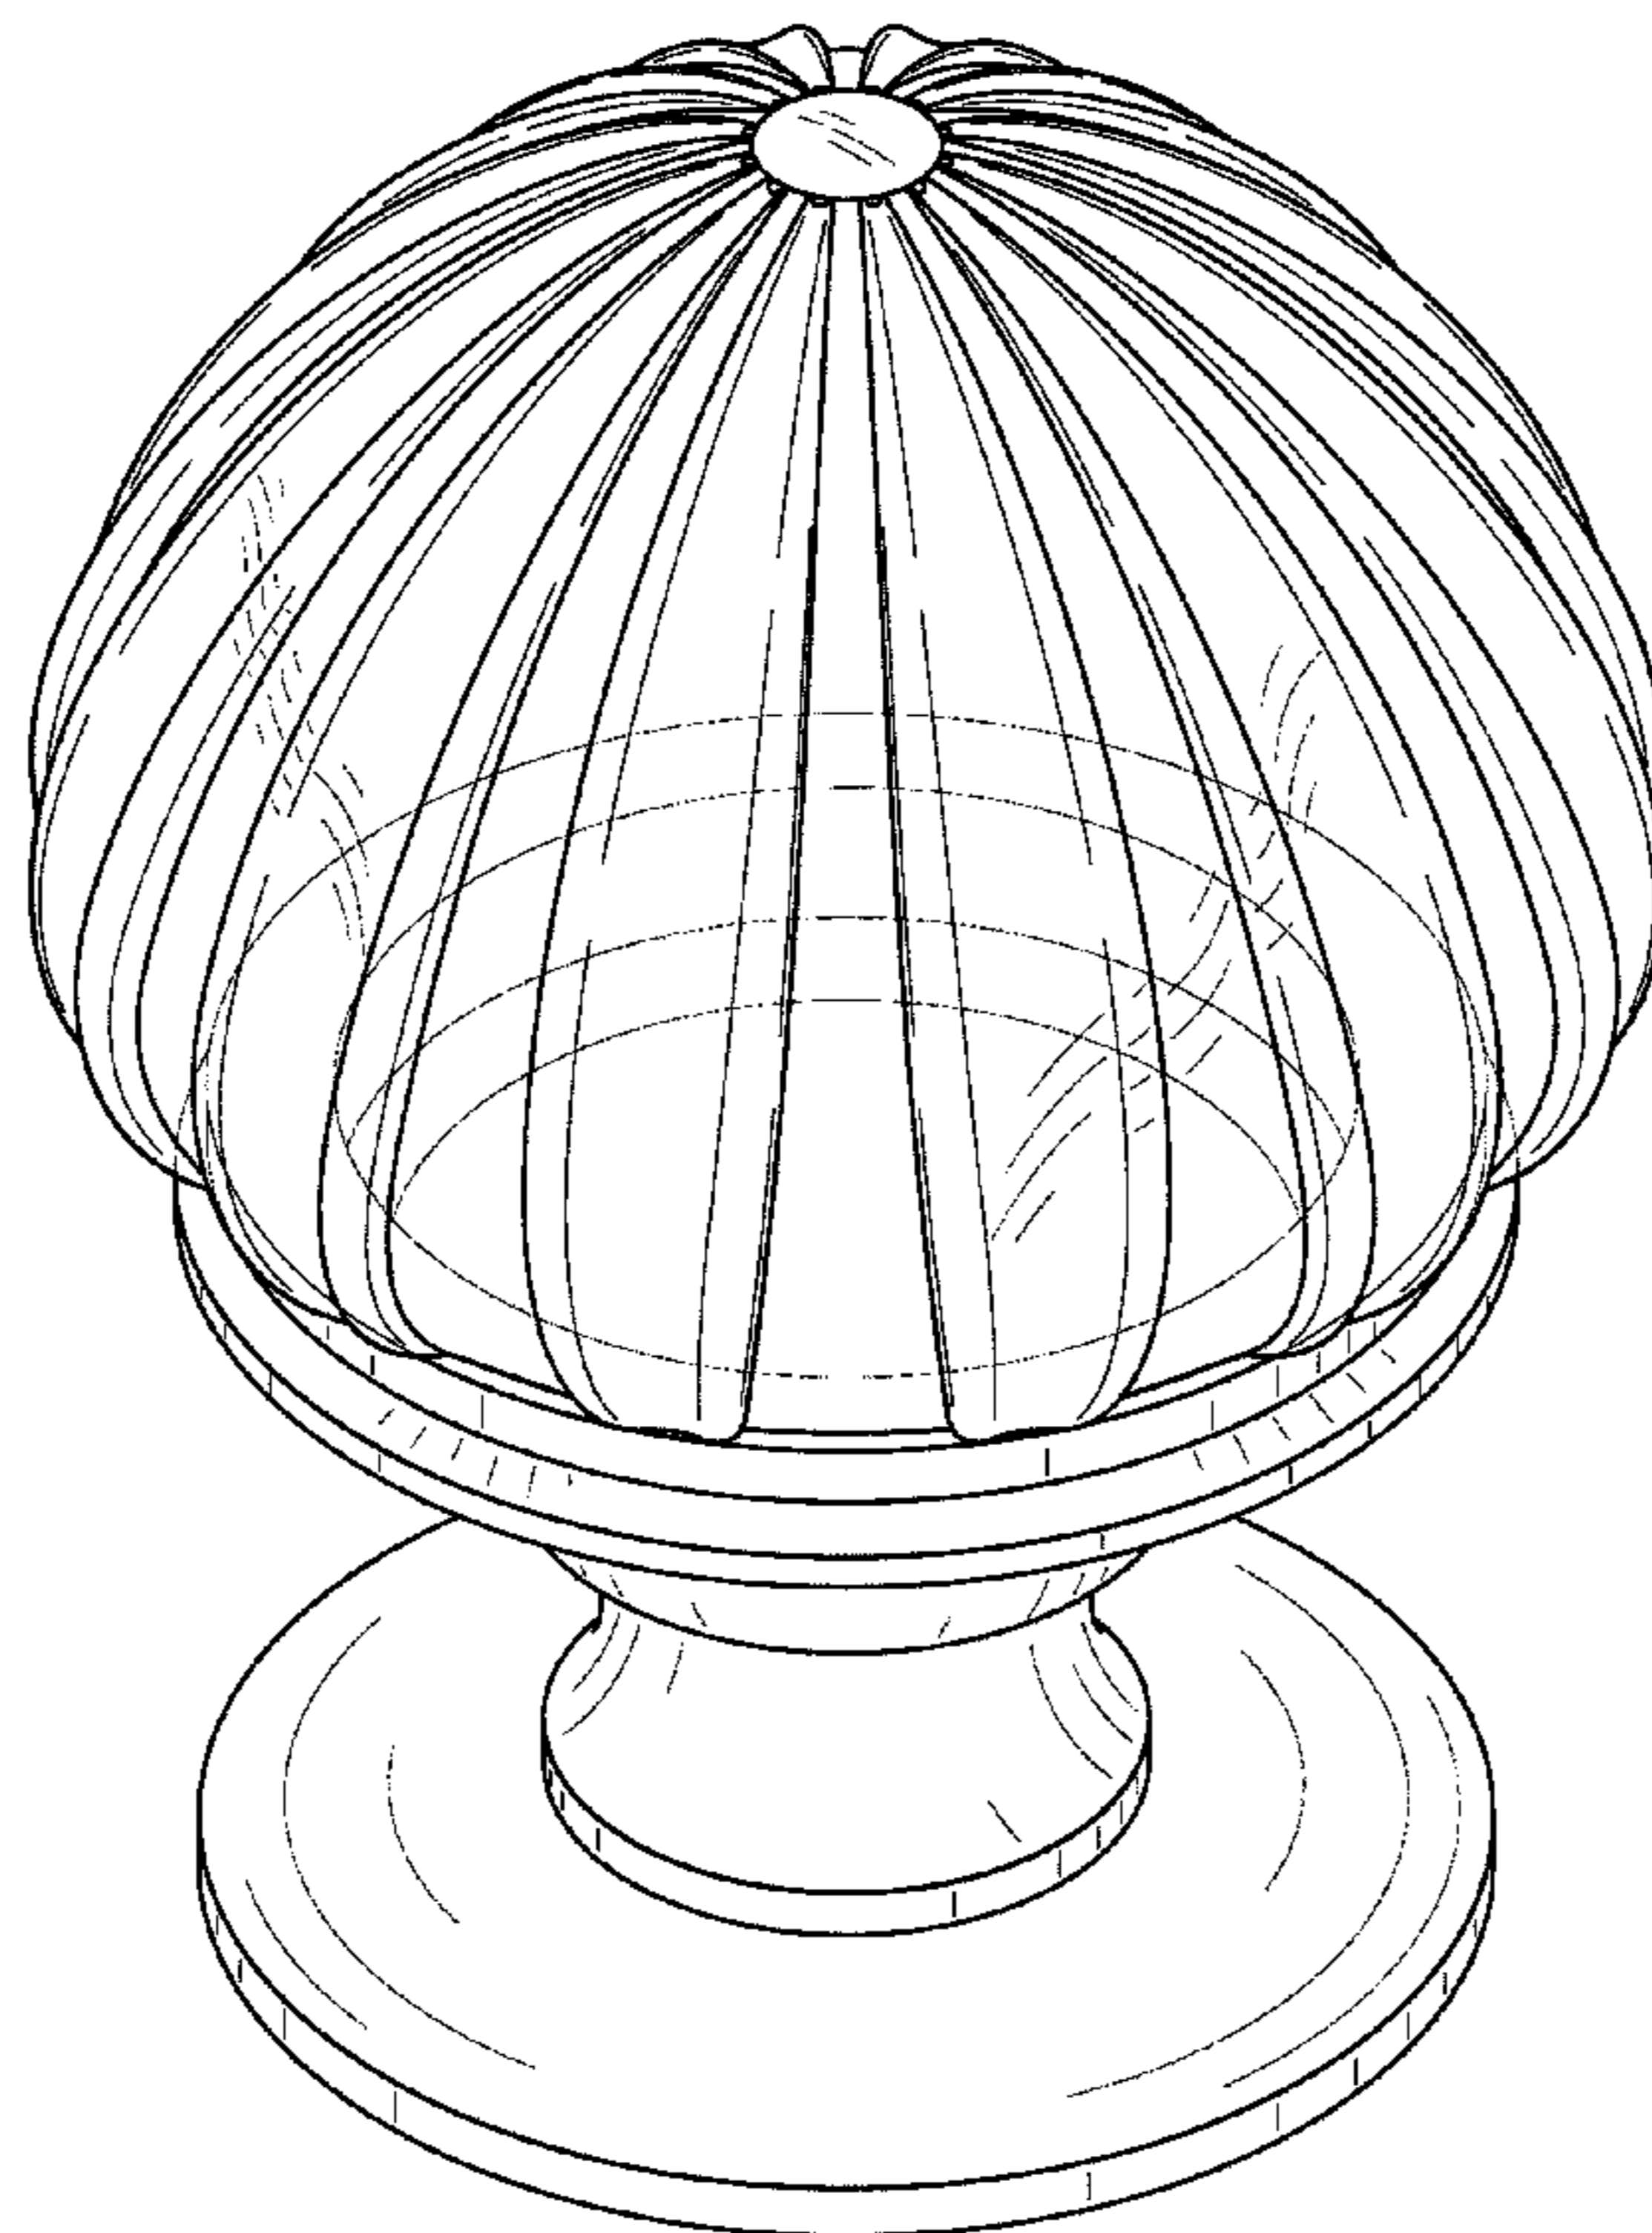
is a perspective view of a cabinet and/or drawer knob of the present claimed design;
